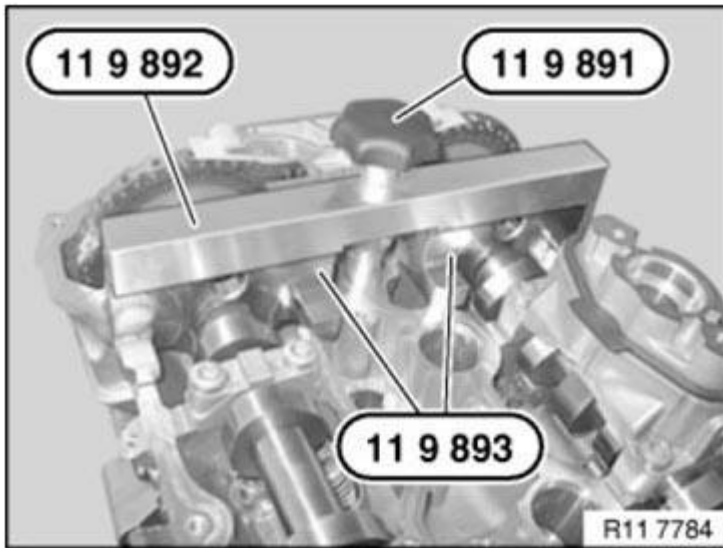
Positioning Special Tool 11 9 892 On Special Tool 11 9 893
